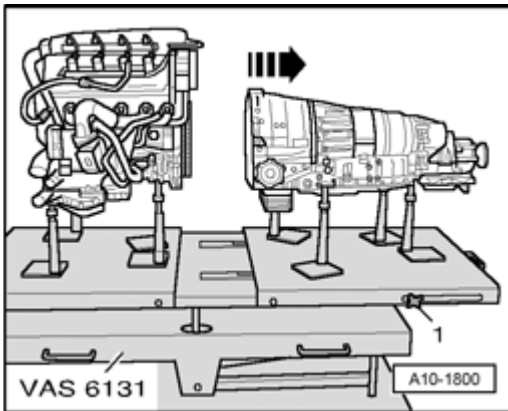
Loosening Clamping Bolts On Side Of Scissor Lift Table VAS 6131 And Pull Rear Table Section With Transmission Rearward
